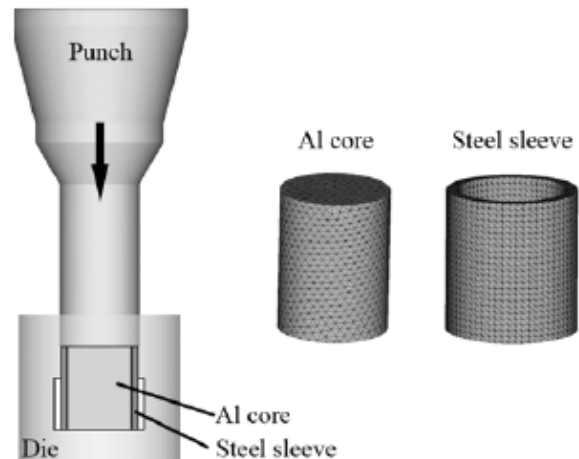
Modelling of radial bimetallic extrusion in Simufact Forming. left: composition of tools and billets, right: inner and outer billet
